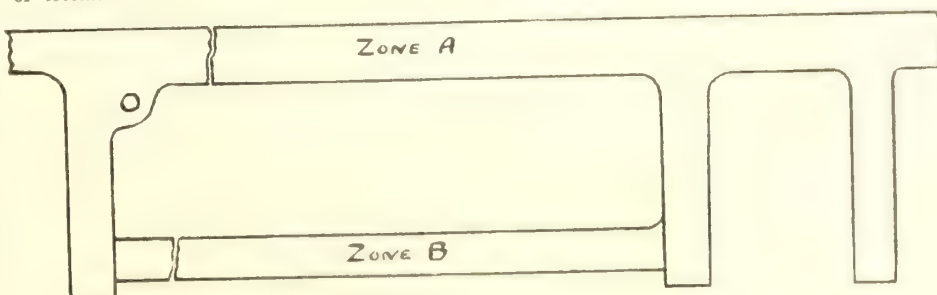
Welding of locomotives 405 and 634.
